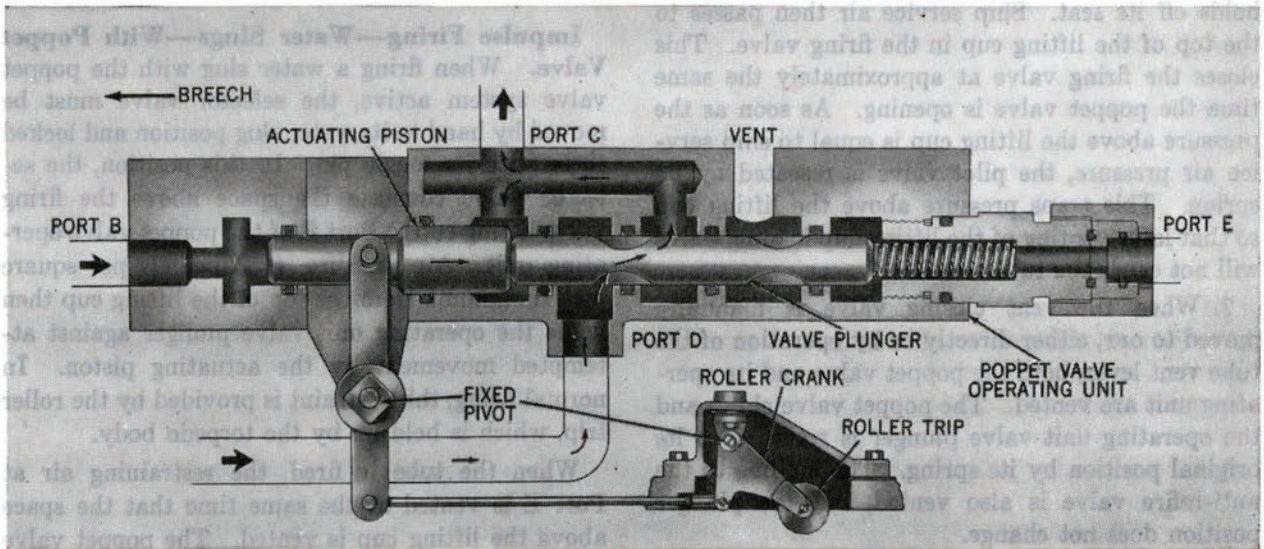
Firing Mechanism Schematic Diagram, Poppet Valve Operating Unit, and Roller Trip Unit—Roller Trip Released.
